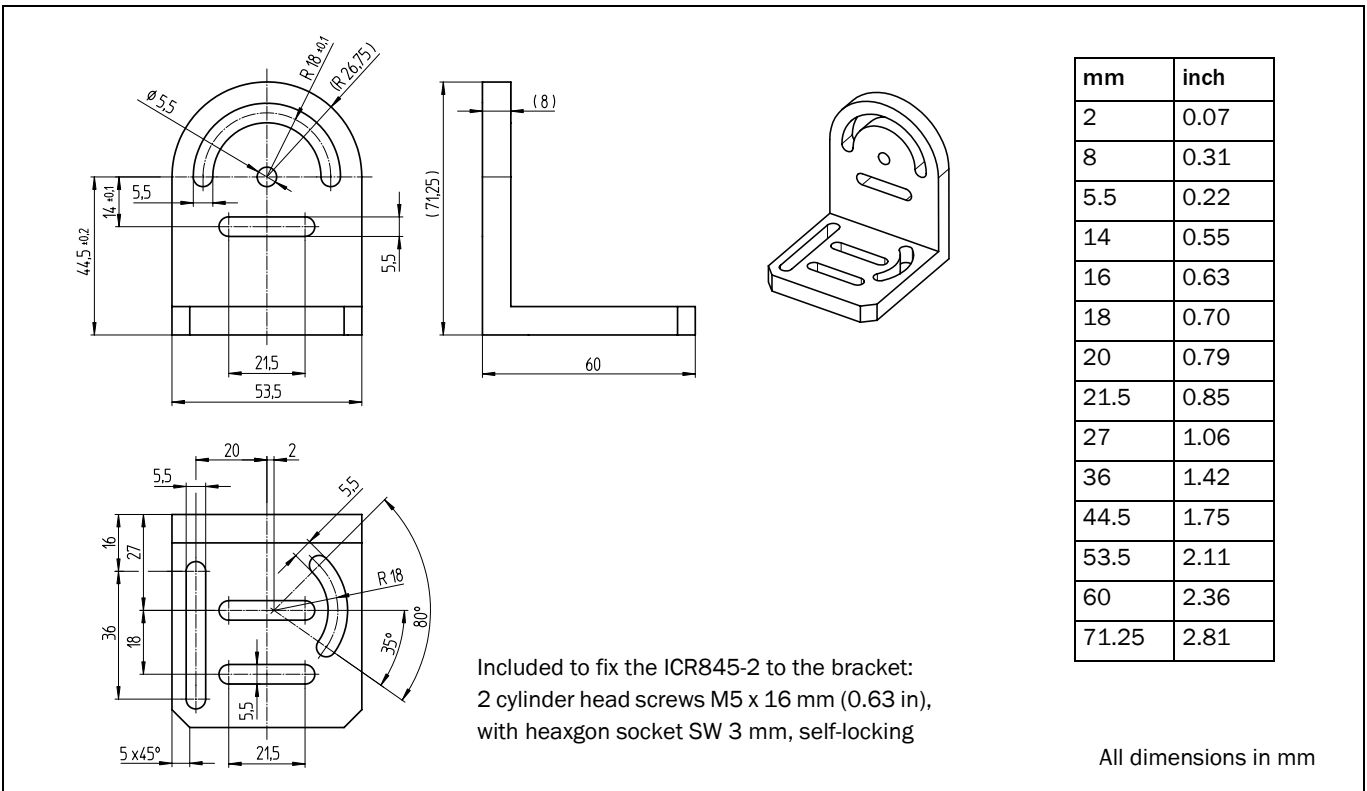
Dimensions of the mounting bracket no. 2039465
